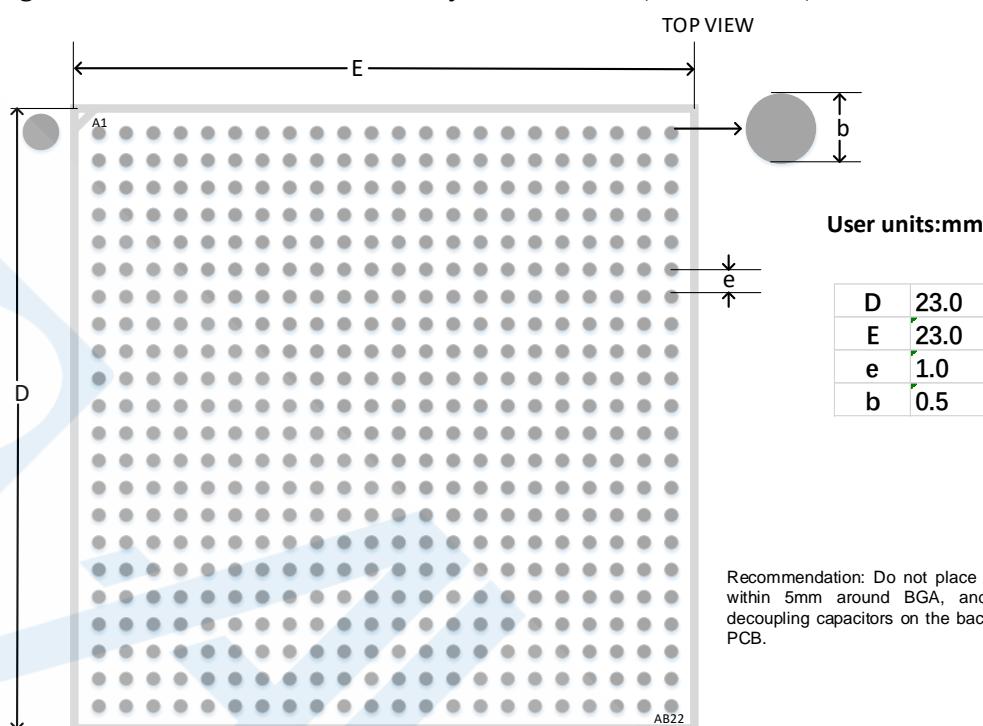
Recommended PCB Layout PG484A (GW5AT-138)
